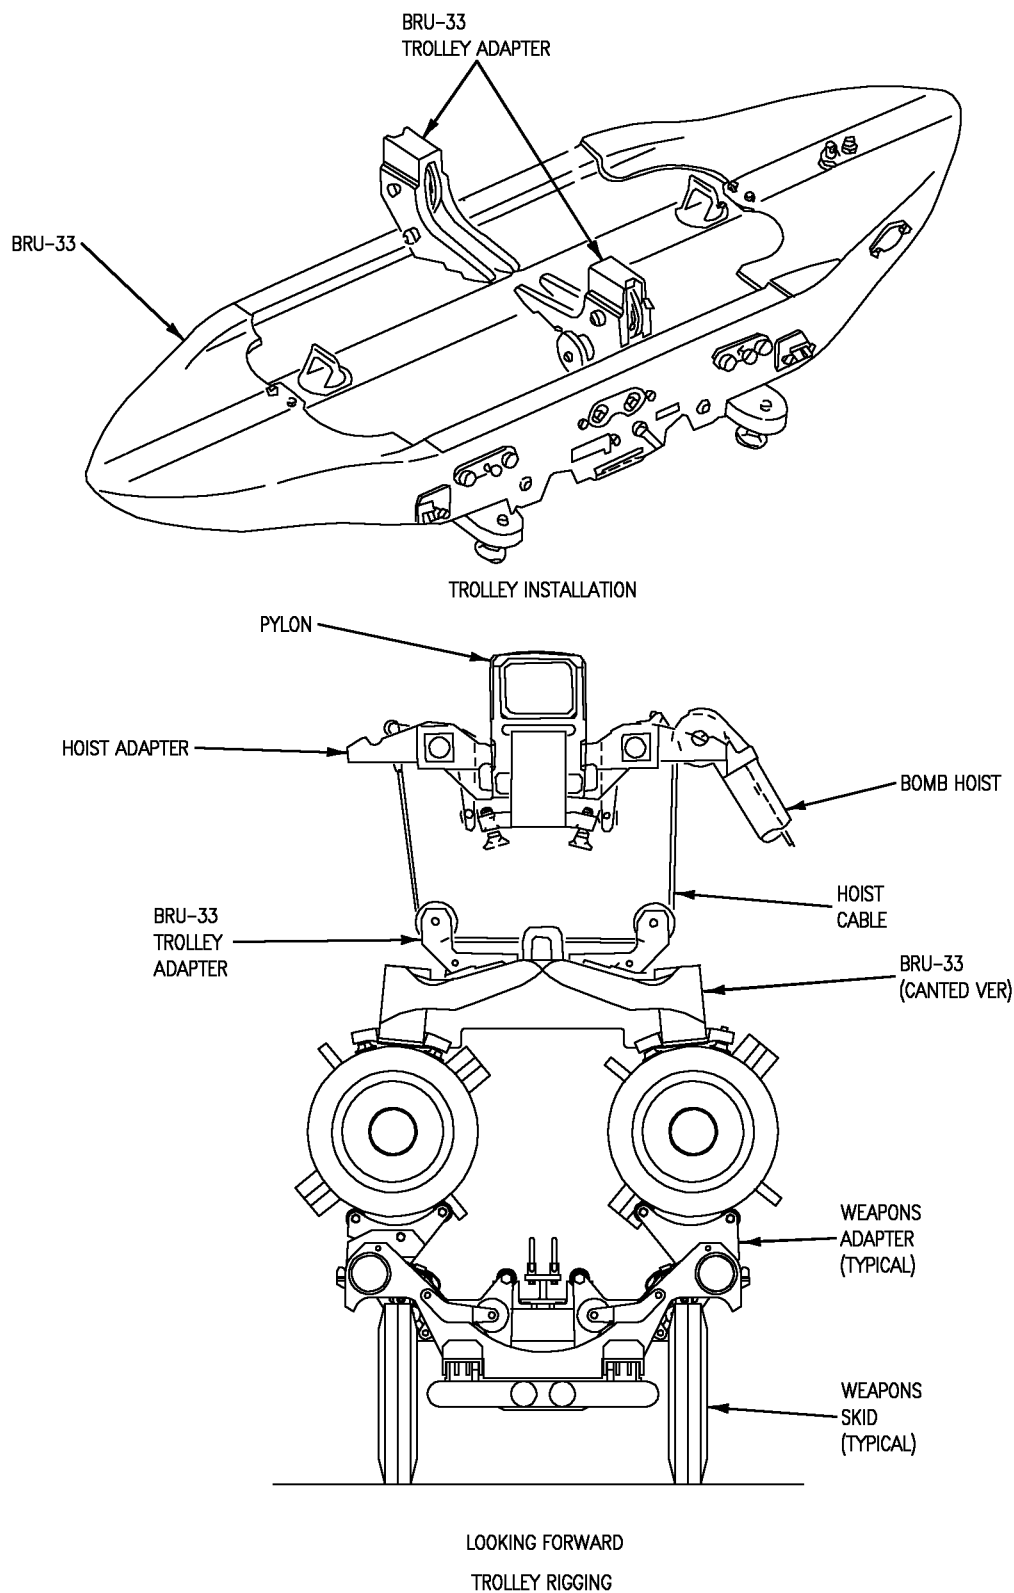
Balanced Preloaded BRU-33 Trolley Adapter (74D750000) Installation and Rigging
